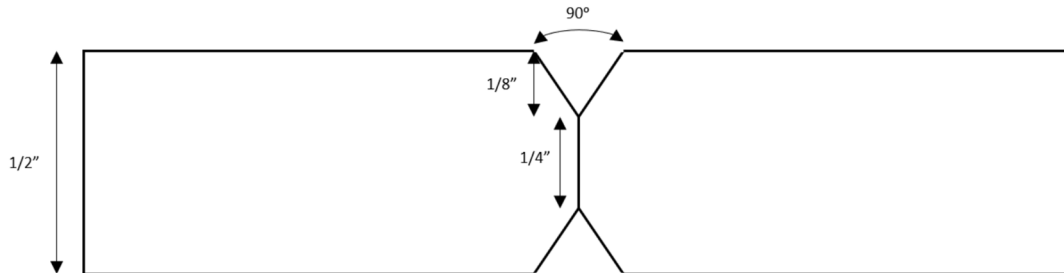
Original MPC shell-to-shell longitudinal weld joint
